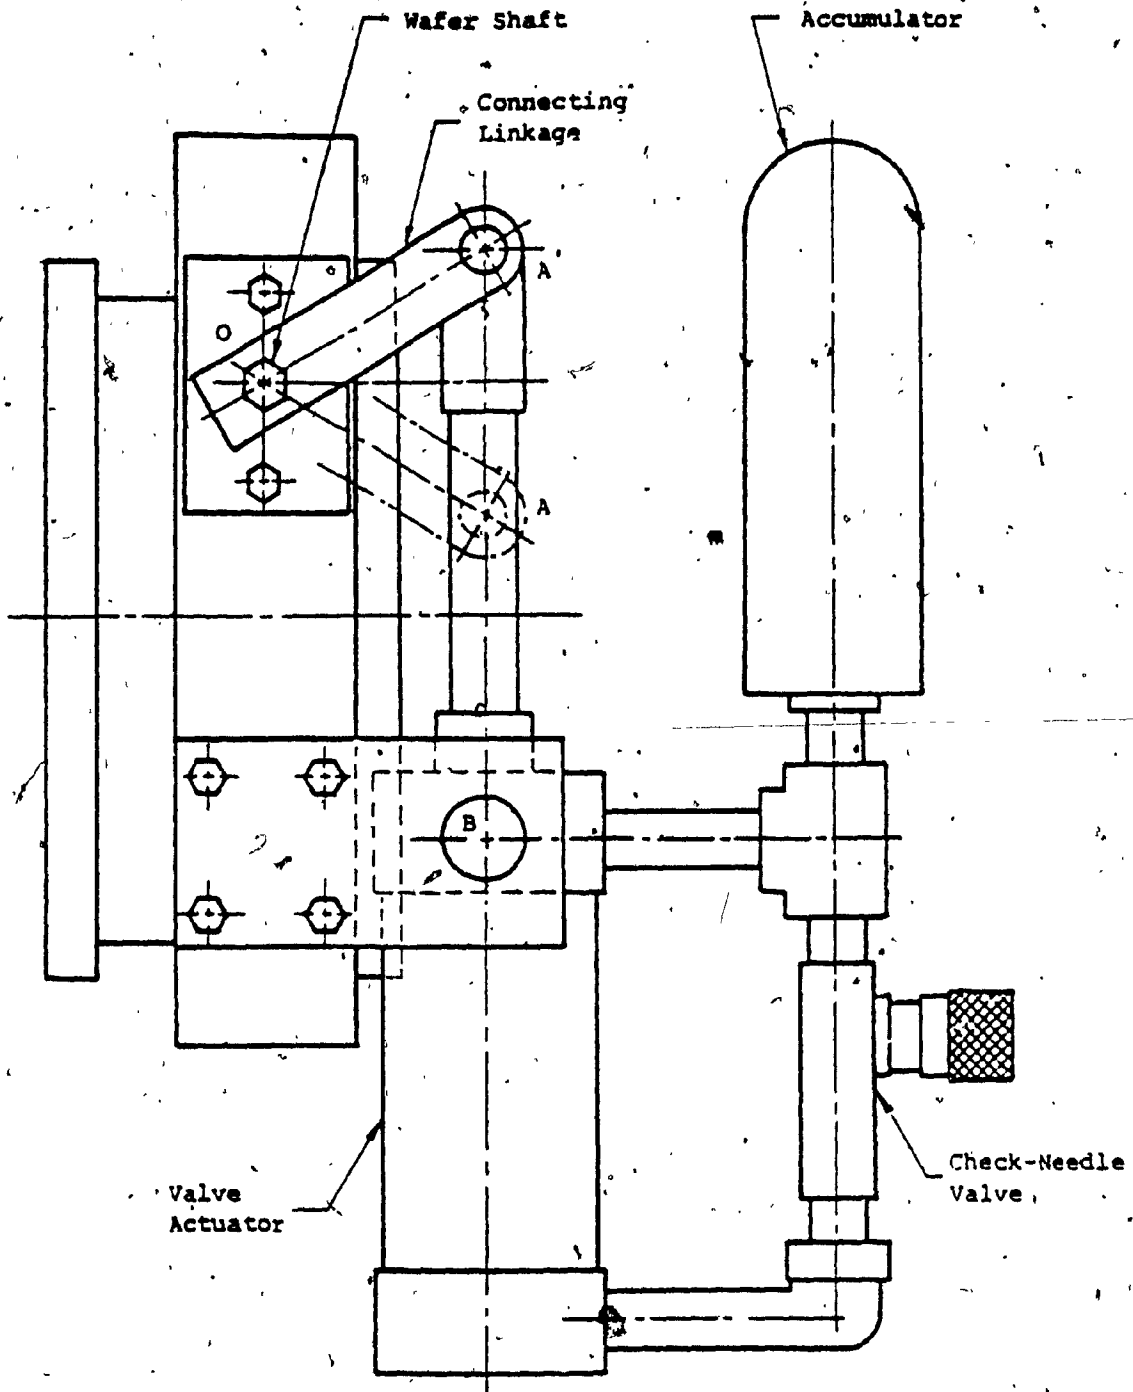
Hydro-Pneumatic Spring-Damper Valve Actual Arrangement [9]
